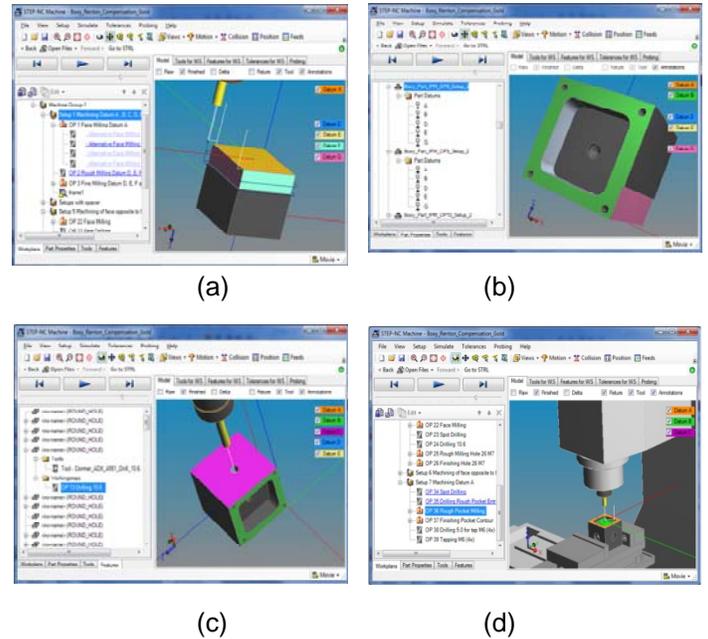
Machining using STEP-NC. (a) workingsteps add or remove data volumes, (b) product models define geometric dimension and tolerance constraints, (c) manufacturing features with associated cutting tools, and (d) fixtures in setups on machine tool models.
